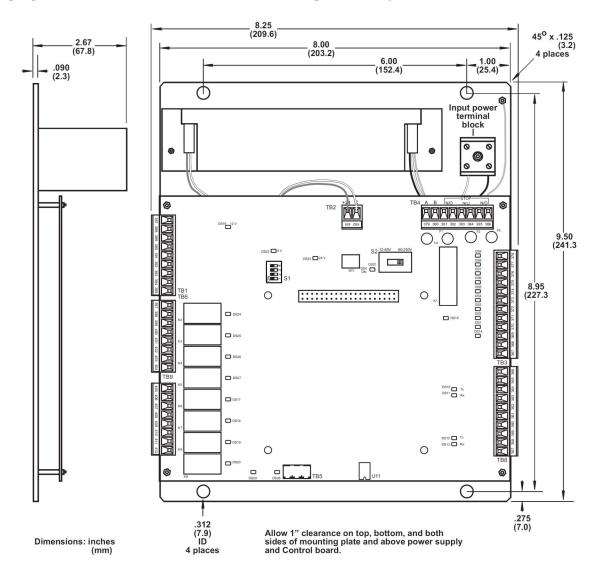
RamPAC Mounting Plate: Mounting Dimensions
